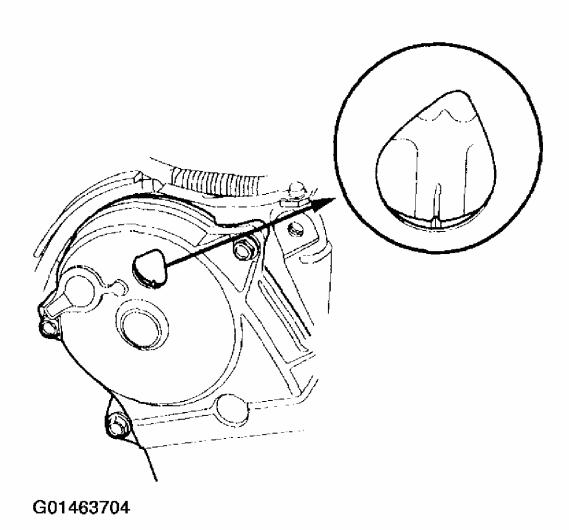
Checking The Camshaft Pulley Marks (Rear Camshaft Pulley) Courtesy of AMERICAN HONDA MOTOR CO., INC.
